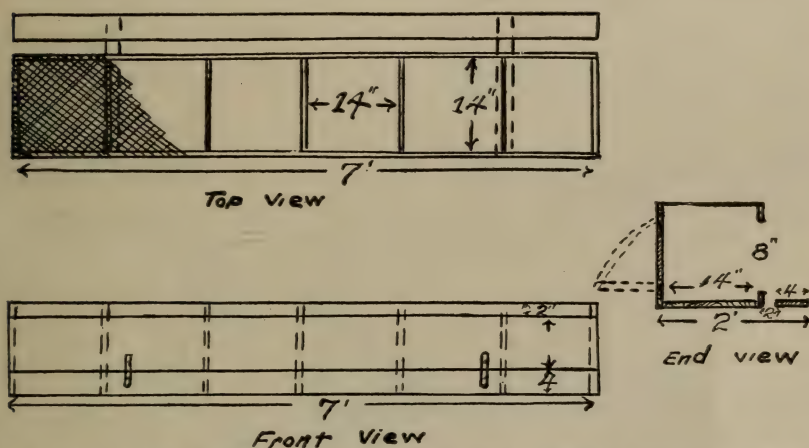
The nests. The top view shows the wire netting and run board. The front view shows the hinged door. The end view, showing the end of the run, entrance opening, door, top, and bottom.
